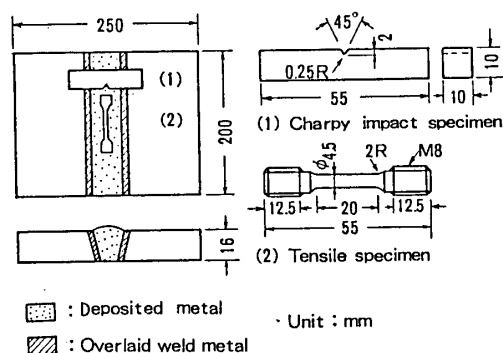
Sampling of specimens from welded joints and configuration of each specimen
